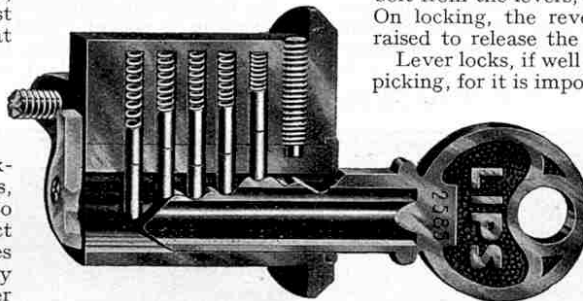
A sectional view of a pin tumbler or cylinder lock. The manner of raising the pins to the "breaking line" is made clear in this illustration.
